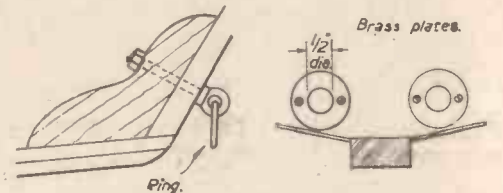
(Left).—Method of fitting the ring bolt. Fig. 41 (Right).—Details of the draining cocks.
